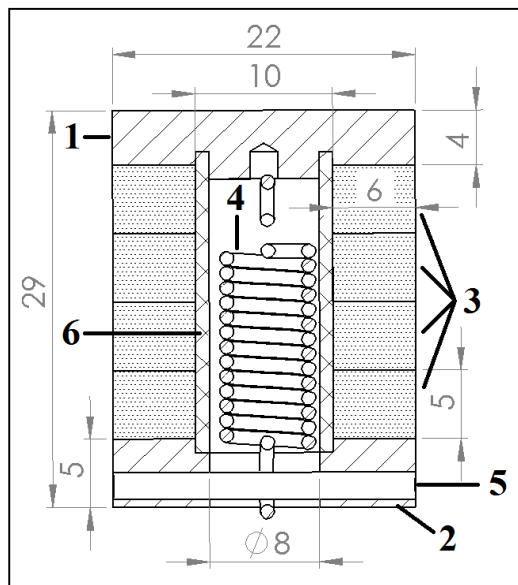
The cross section view of VAP-2: the top (1), the bottom (2), four PZT-4 rings (3), the spring (4), the rod for holding the spring (5) and the plastic tube (6)
